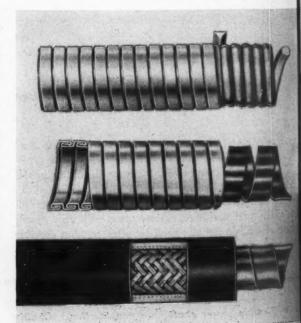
Power drive casings. Top — General pup Center — Heavy duty. Bottom — Heavy-duty portable
